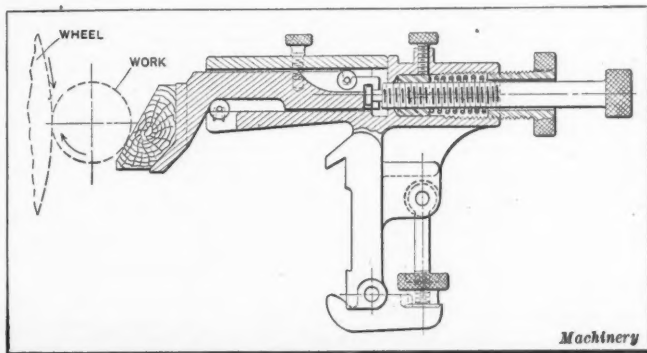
Plain Type of Steadyrest used principally on Universal Grinding Machine
